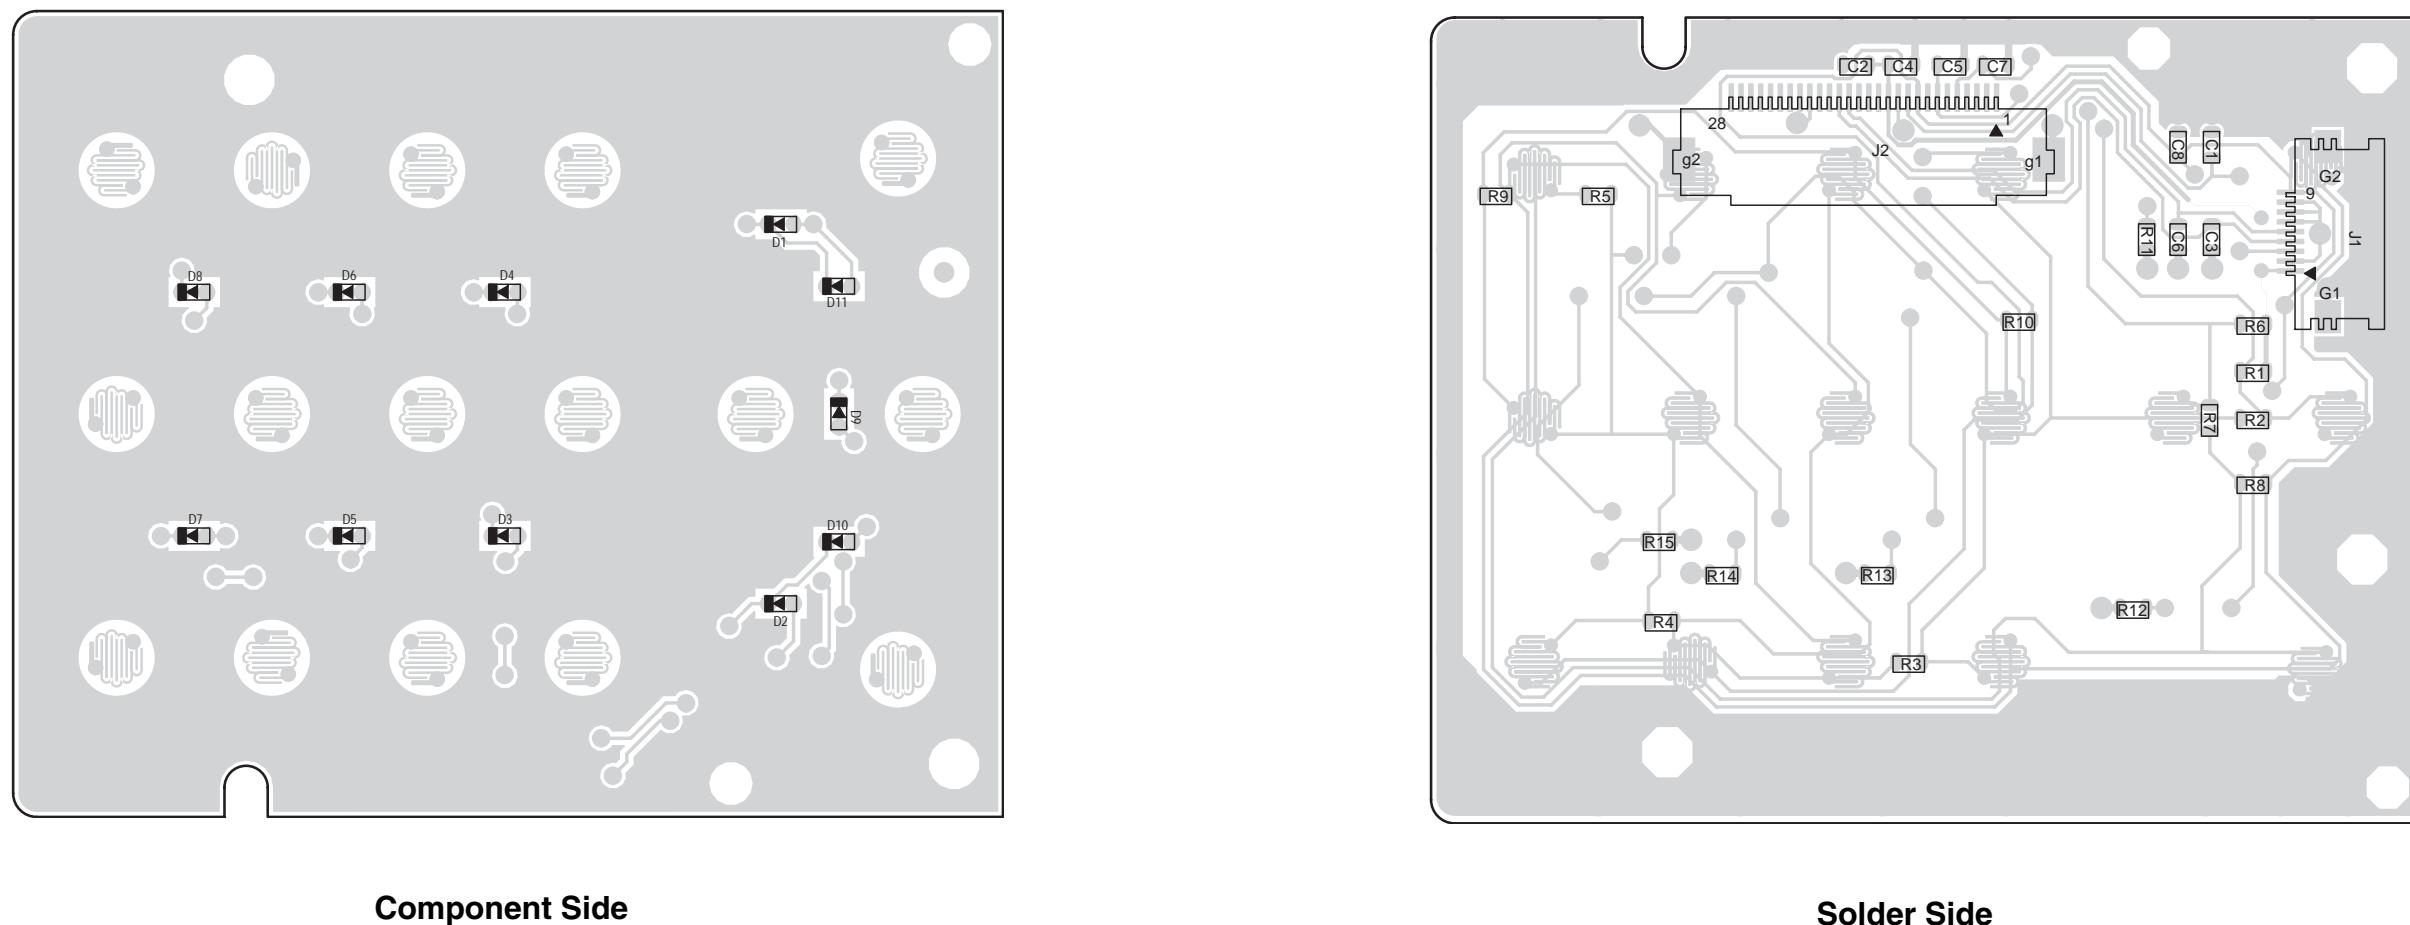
UHF (465-495 MHz) PCB8486634Z02-O Keypad Board
